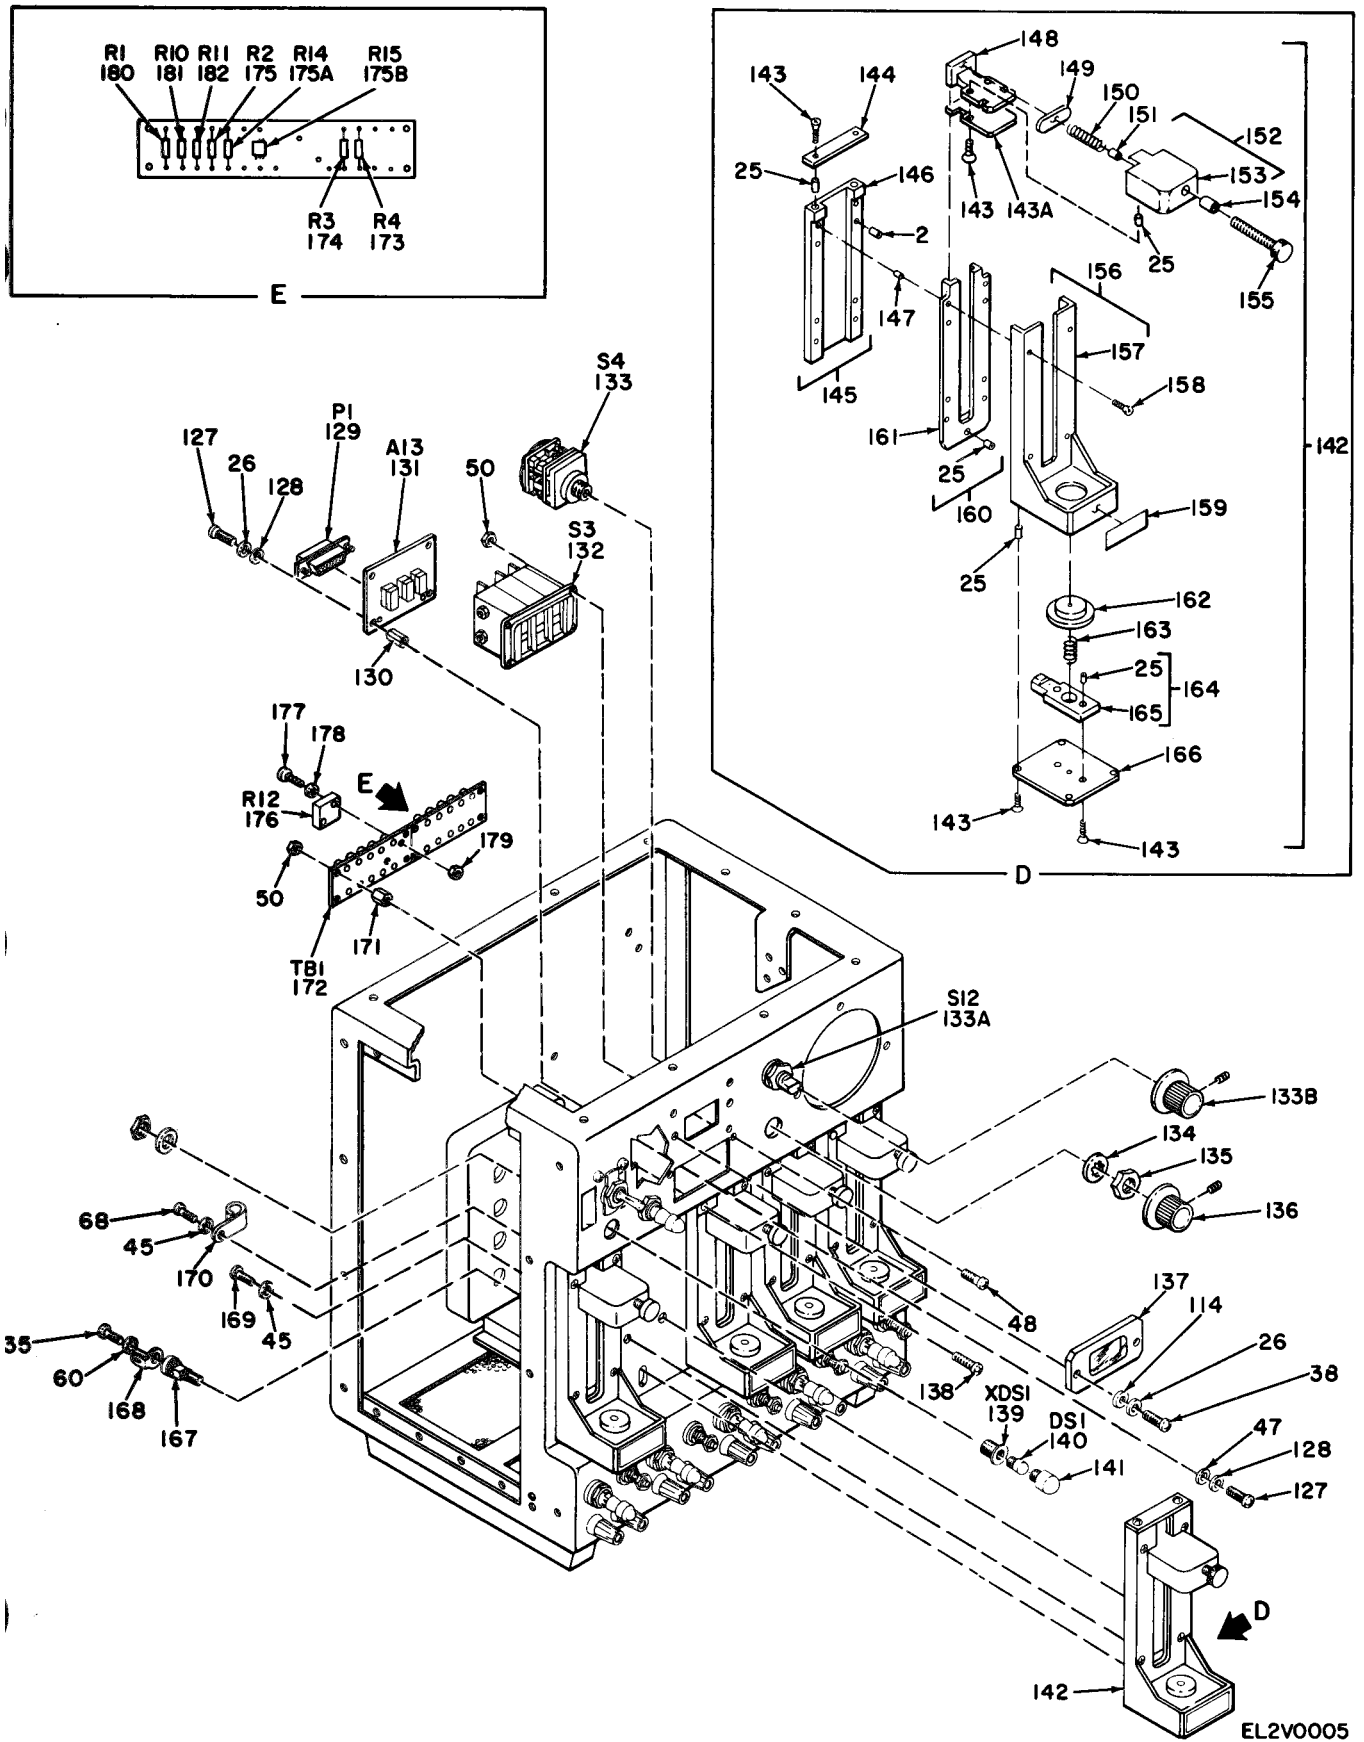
Battery Charger Assembly (Sheet 4 of 5).
